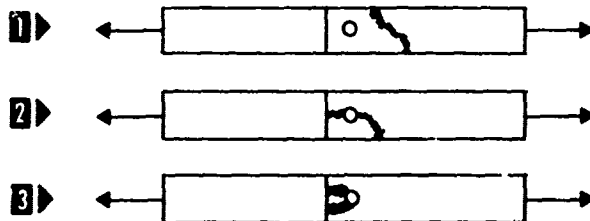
Mechanical Attachment Fatigue Specimen Failures
